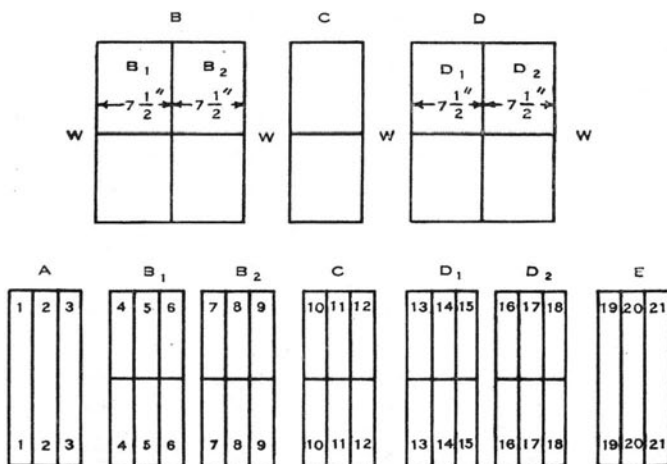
PLAN OF WELDING AND CUTTING TEST PLATES AND PANELS
